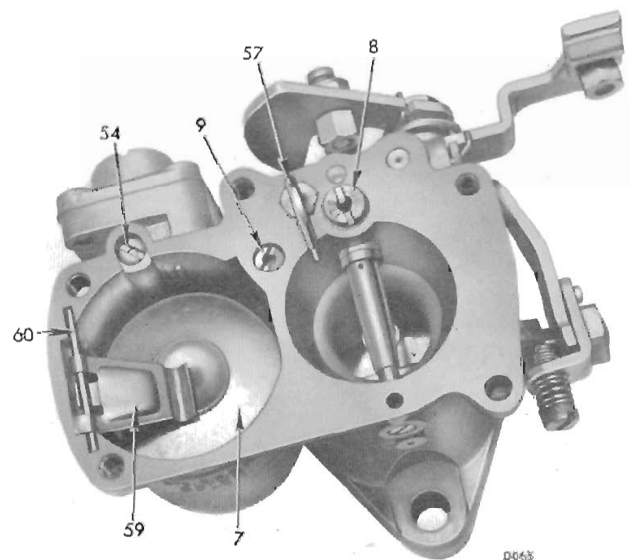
B30 PSE1 carburettor, showing the top cover removed
